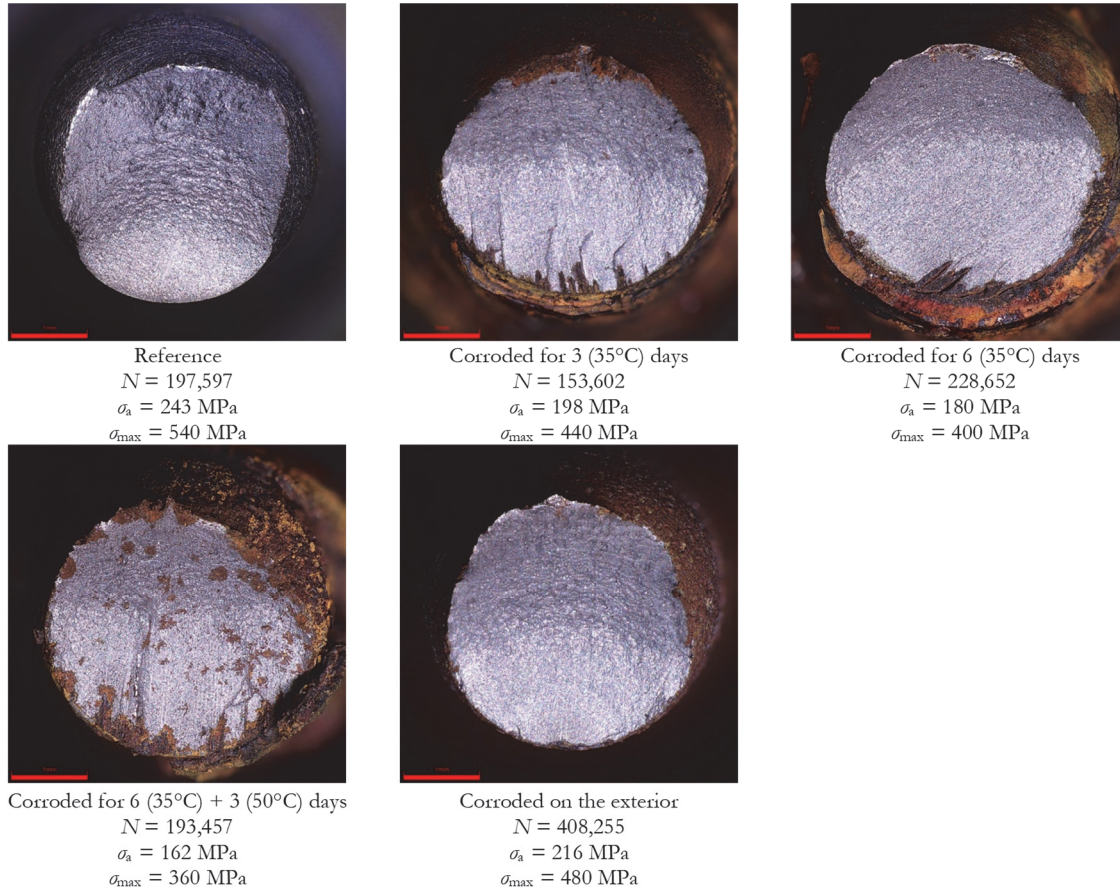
A set of photographs of fracture surfaces of steel specimens for the region of approximately 200,000 cycles.
